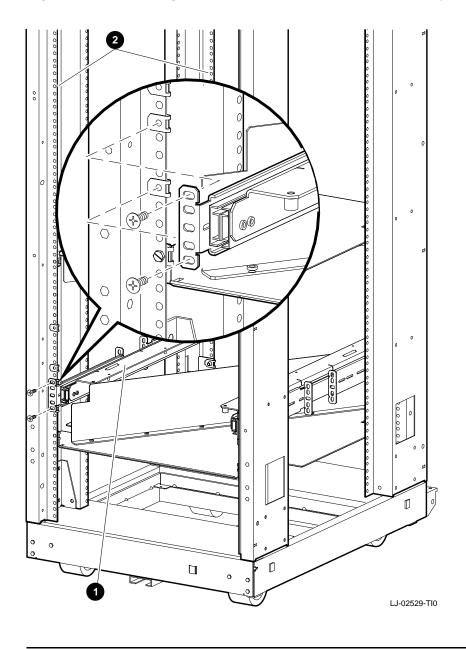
Installing the Left Side Chassis Slide Assembly
